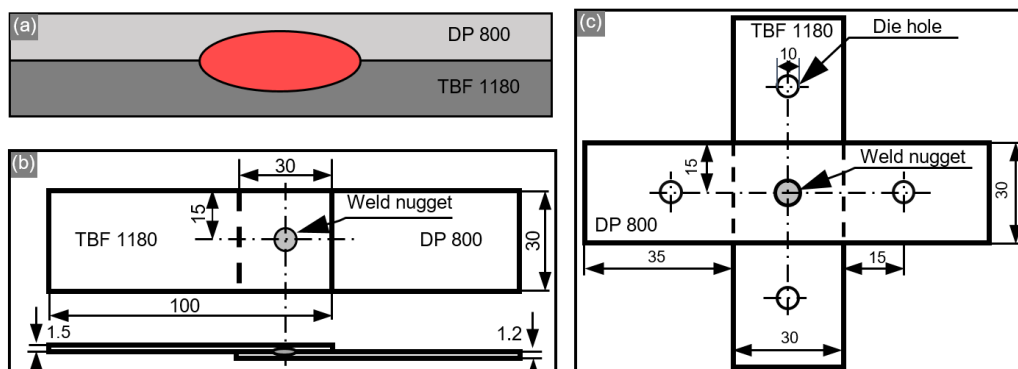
Illustration of; (a) weld nugget position, (b) tensile-shear and (c) cross-tensile test specimens (EN ISO 14273)
